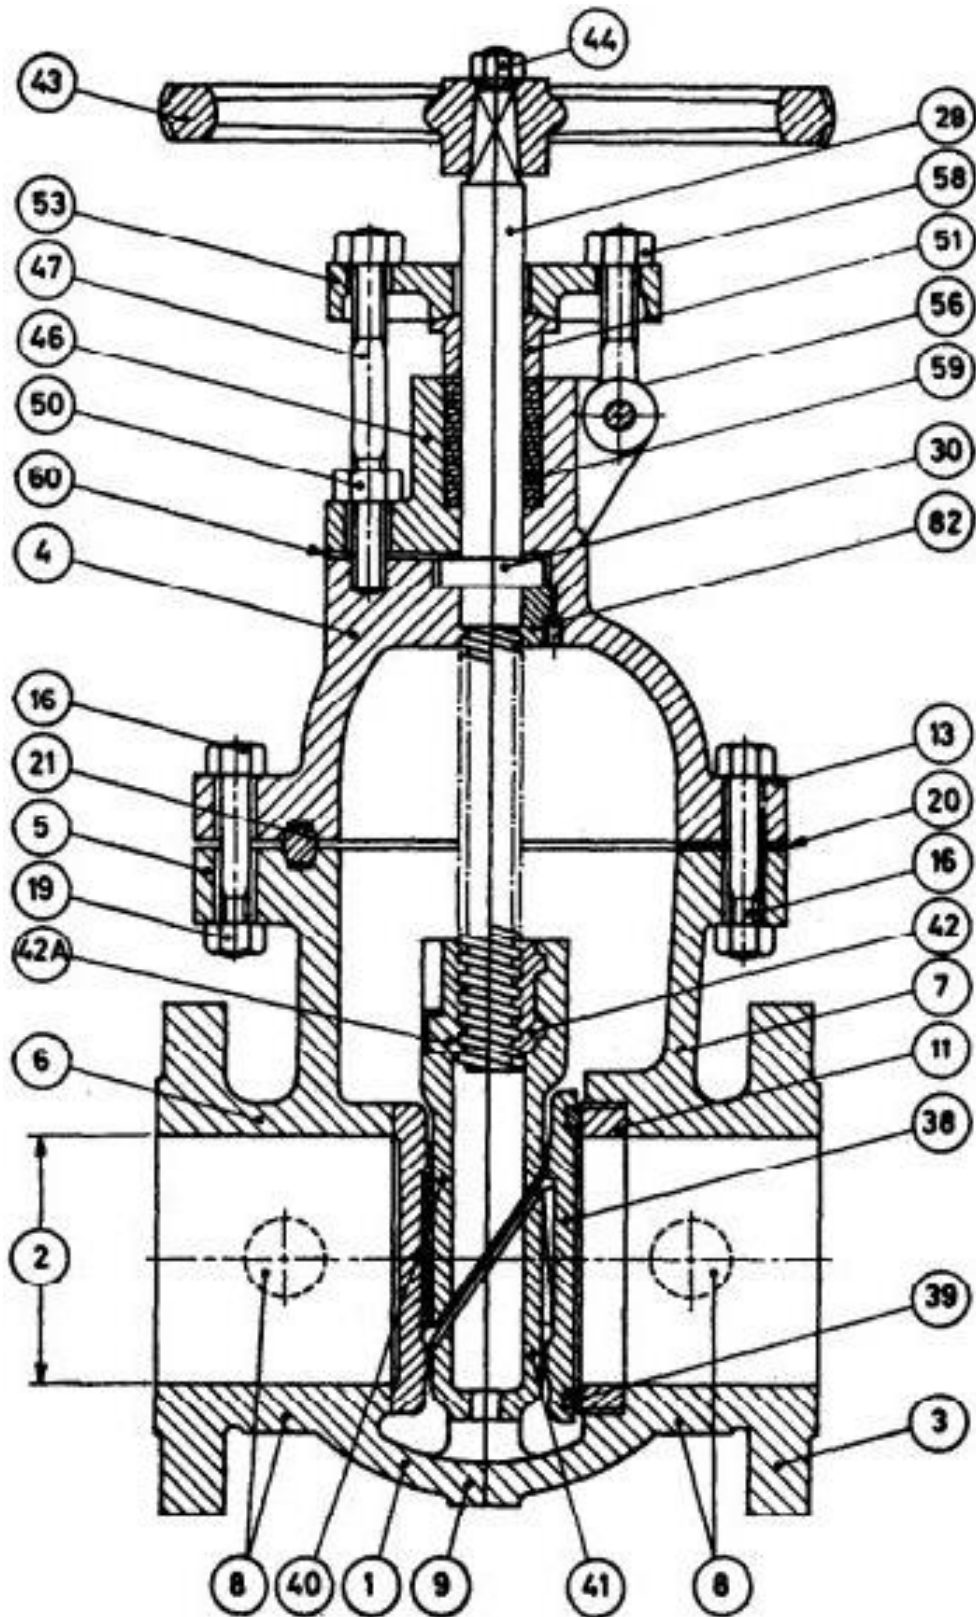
INSIDE SCREW, DOUBLE DISK, NON-RISING STEM
